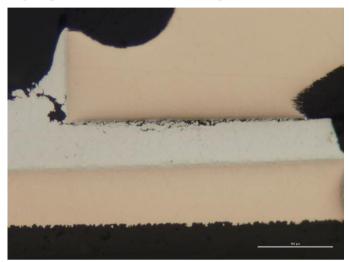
Cross-section of SAC305 soldered QFN component with 7 ppm/°C mold compound and non-wettable flanks
